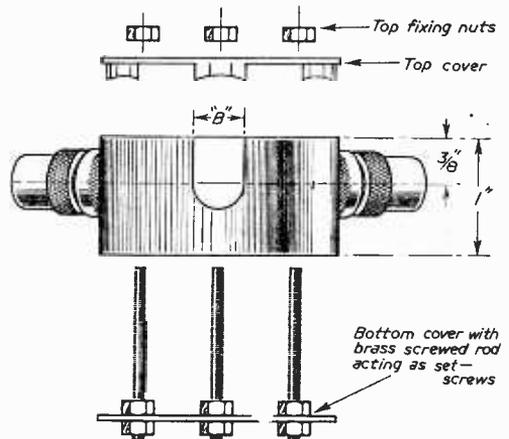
An exploded assembly, with one standard connector omitted to show the slot arrangement.
